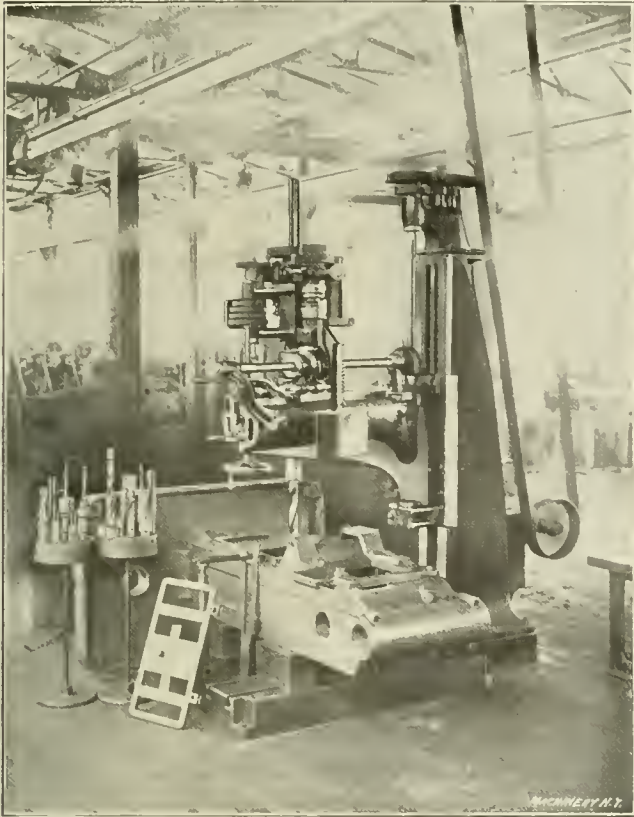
Operation 10-a. The Jig on Top is located by Horizontal Milled Ledge on Side of Column. The Door Jig leans against the Clamp Jack
